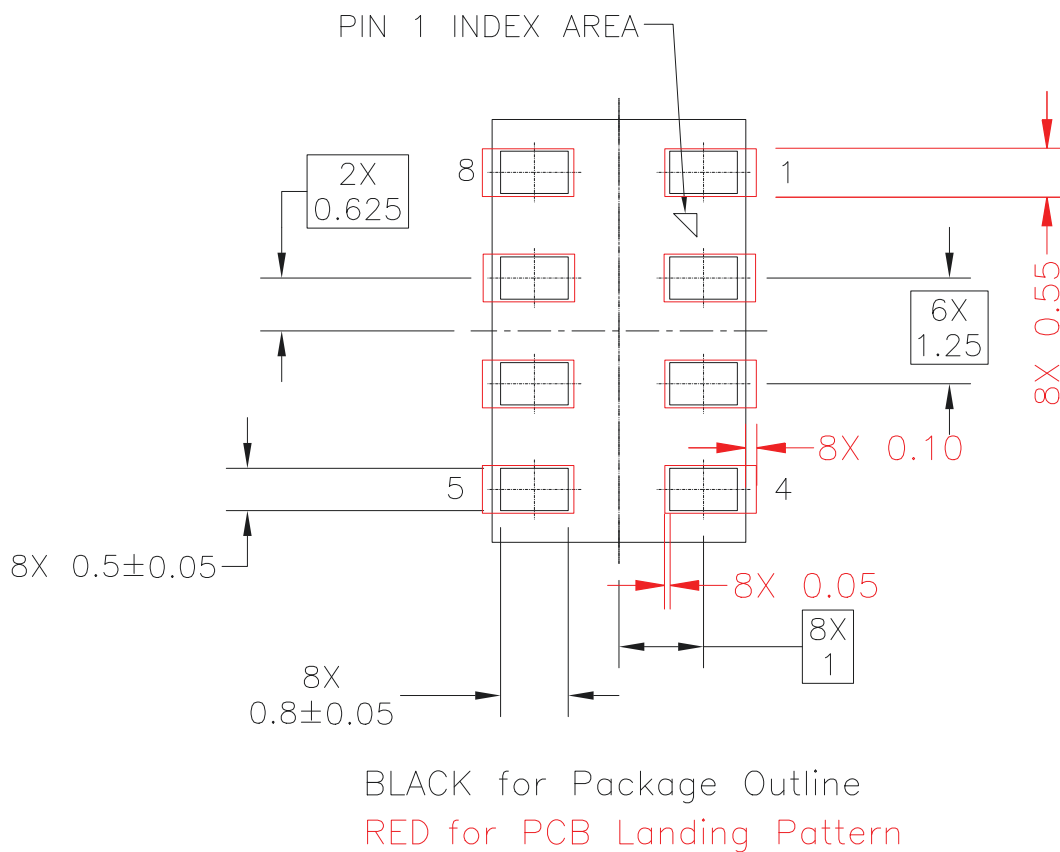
MPL115A2 Recommended PCB Landing Pattern
